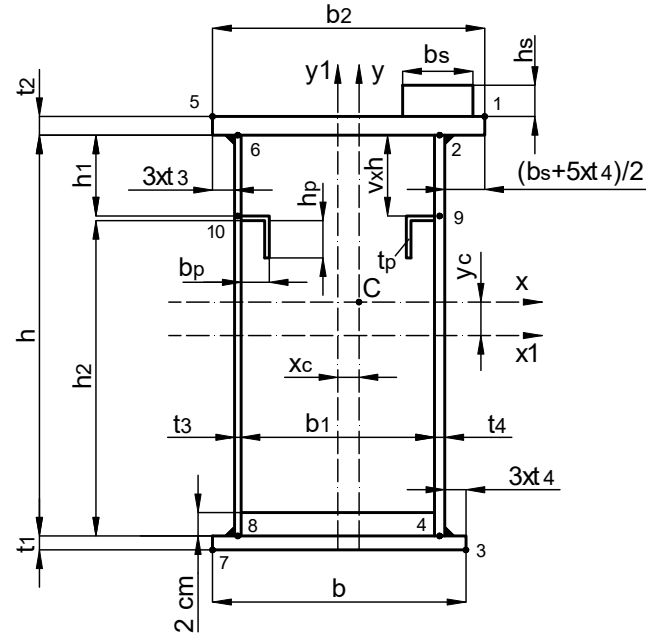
The cross-section of the main girder of the double-beam bridge crane
